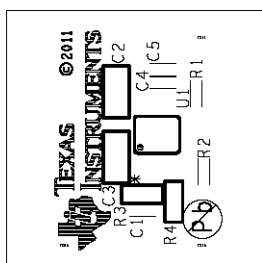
SMP-TPS7A3001-MVK Board Silkscreen – Bottom Side
